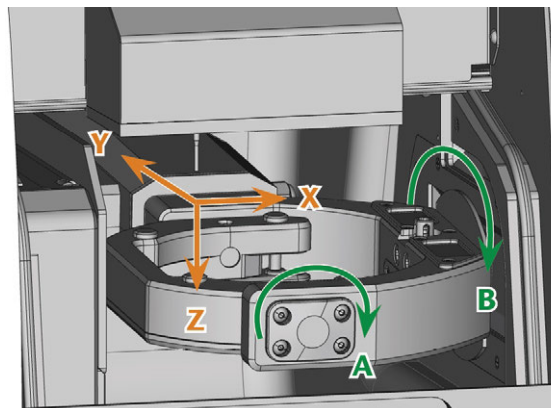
LINEAR AXES X, Y, Z (THE SPINDLE MOVES ALONG THESE AXES.); ROTARY AXES A, B (THE BLANK HOLDER ROTATES ABOUT THESE AXES.)
